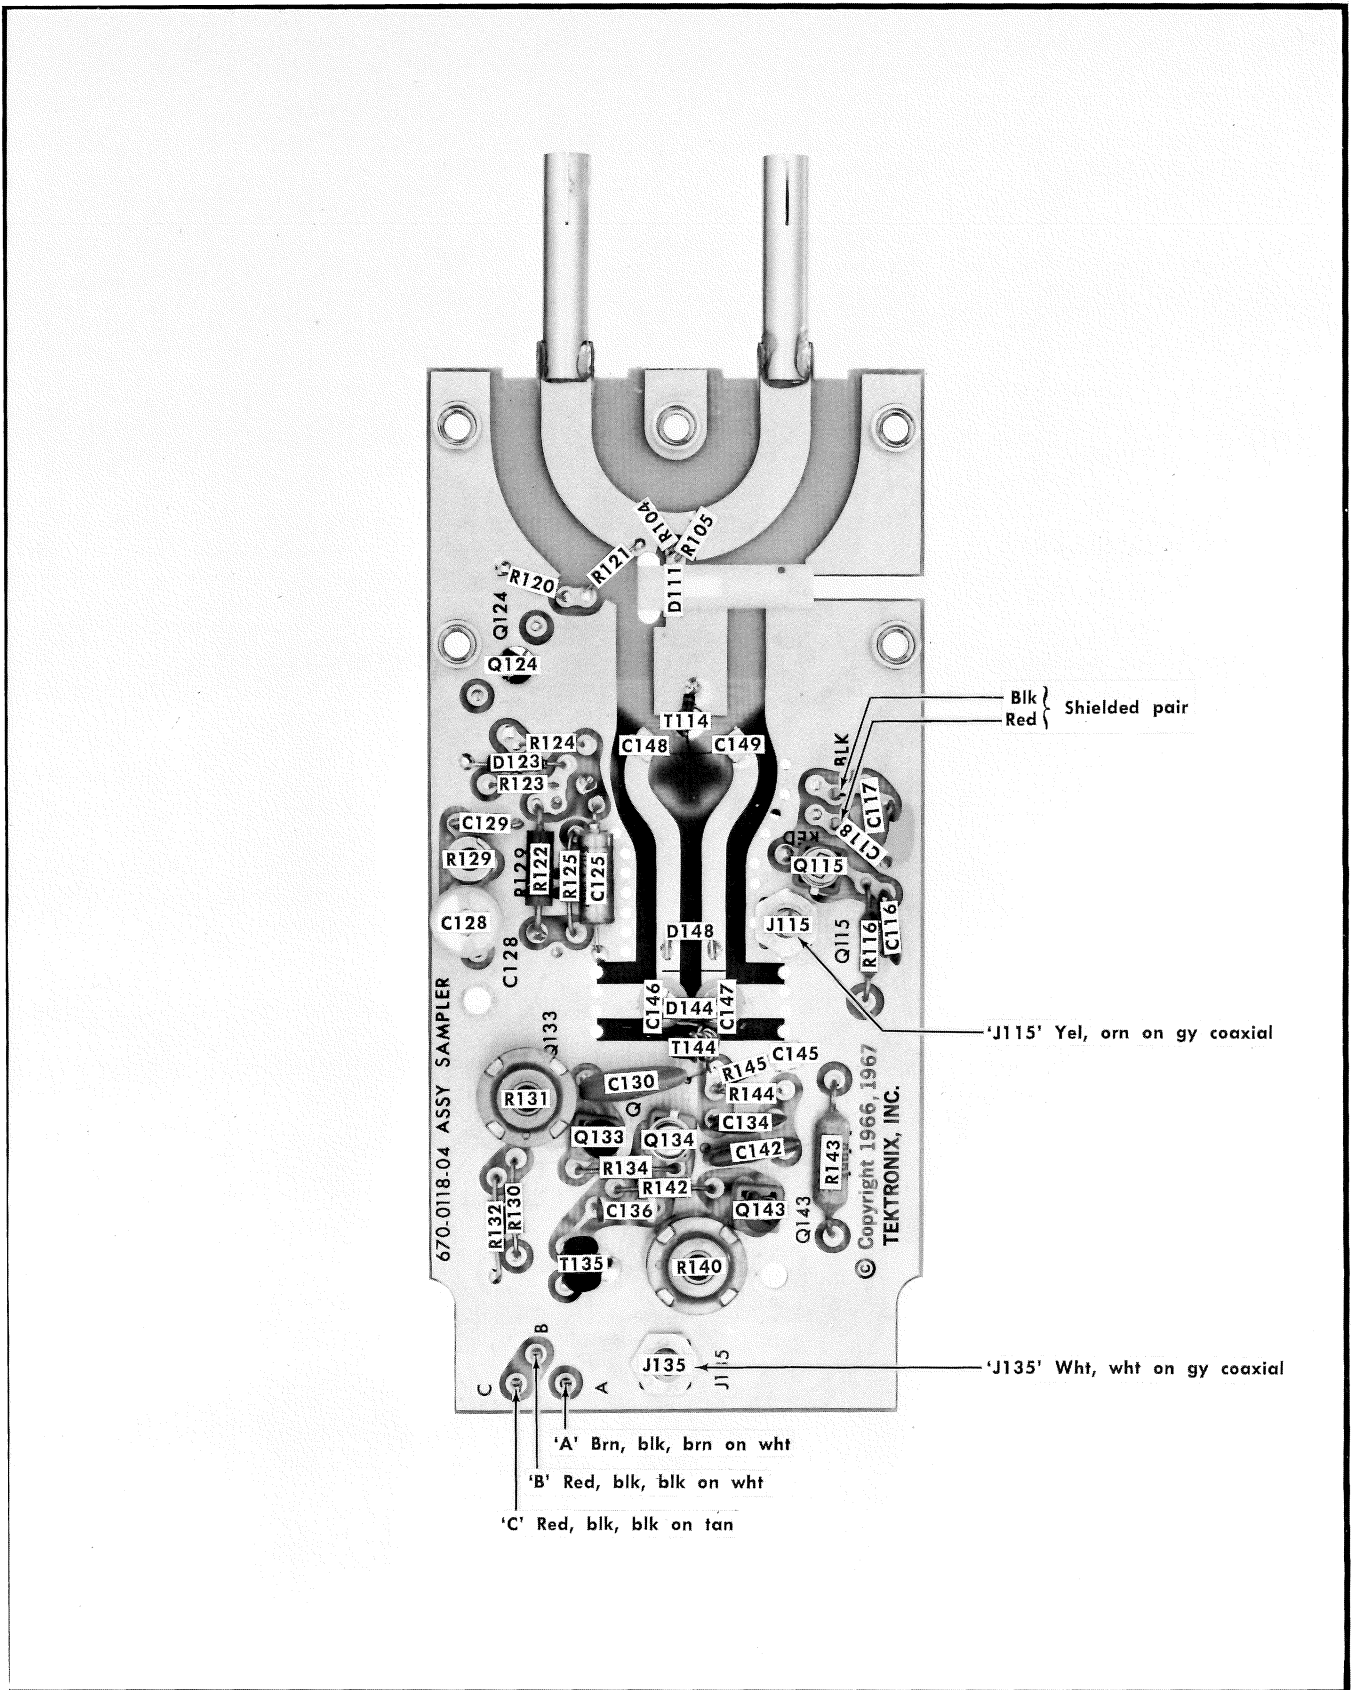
C. Sampler circuit board assembly (front) SN 1989-2999.
